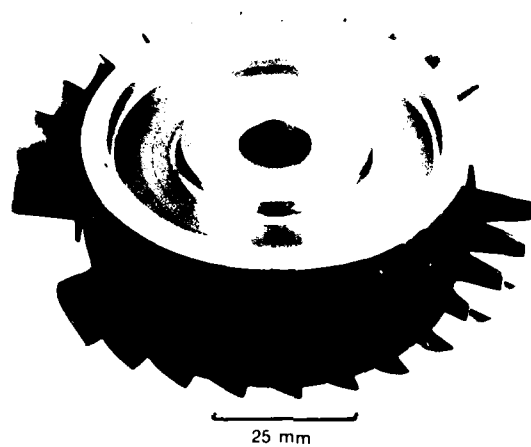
Hybrid Rotor Prior to Assembly With Spin Tooling
